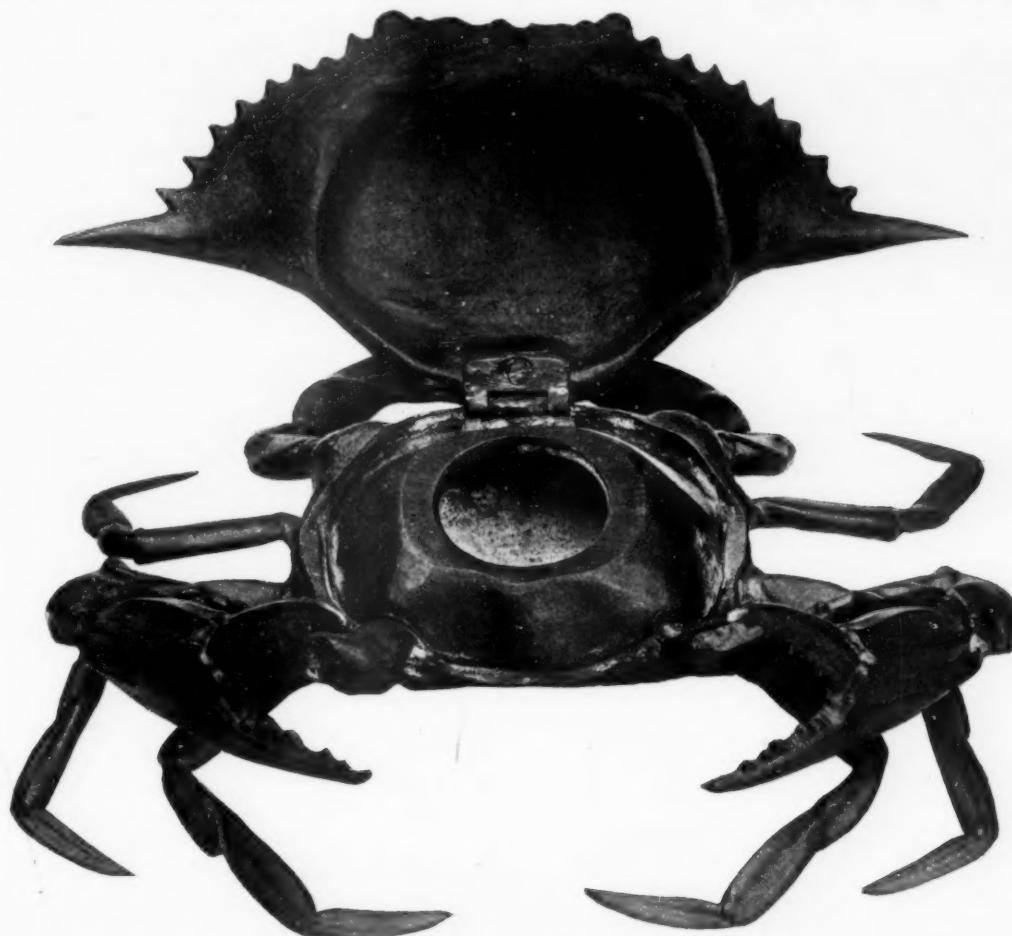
THE COMPLETED BRONZE CASTING MADE BY USING A CRAB FOR A PATTERN.
